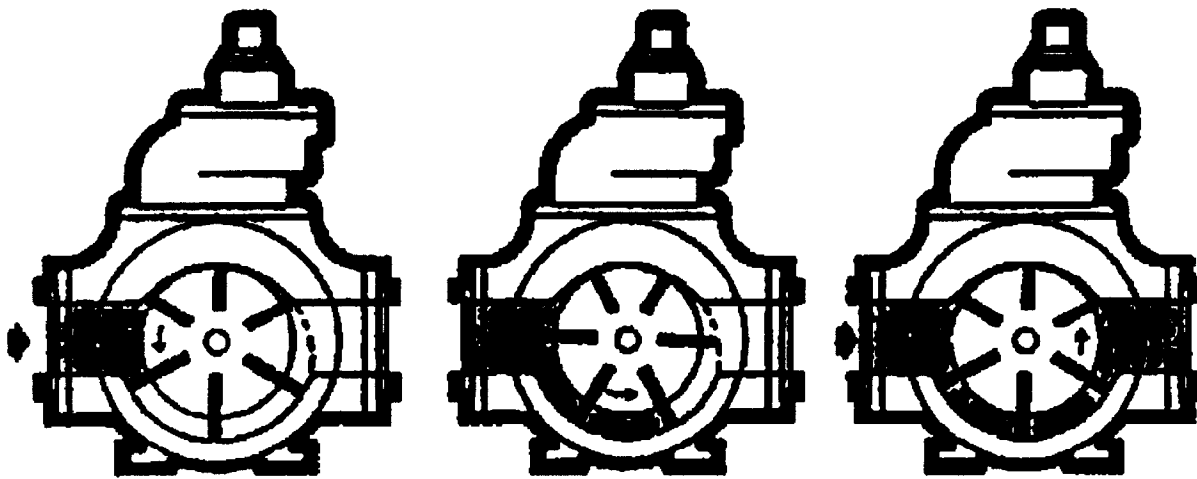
Rotary Pump With Sliding Vane Rotor Assemblies
